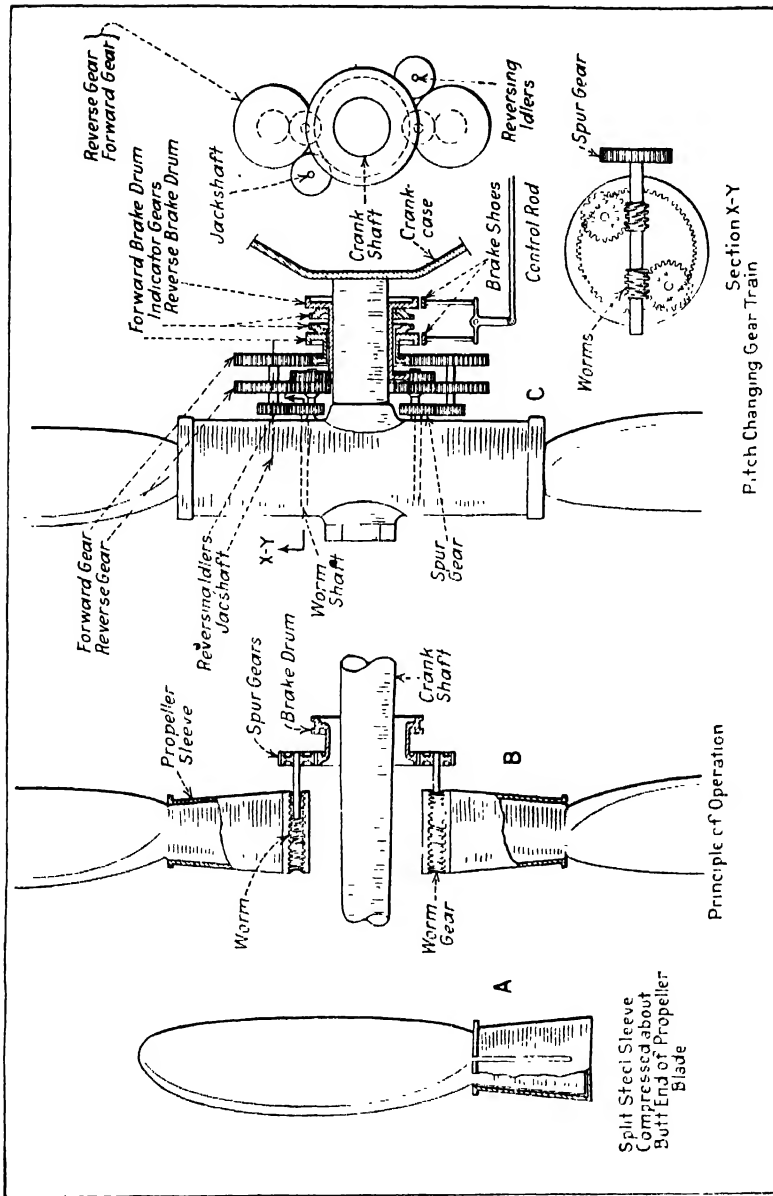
Diagrams Showing Construction of Universal Adjustable and Reversible Propellers. A—Split Steel Sleeve Compressed about Butt End of Propeller Blade. B—Principle of Blade Angle Changing Mechanism. C—Showing Operation of Pitch Changing Gear Train.
